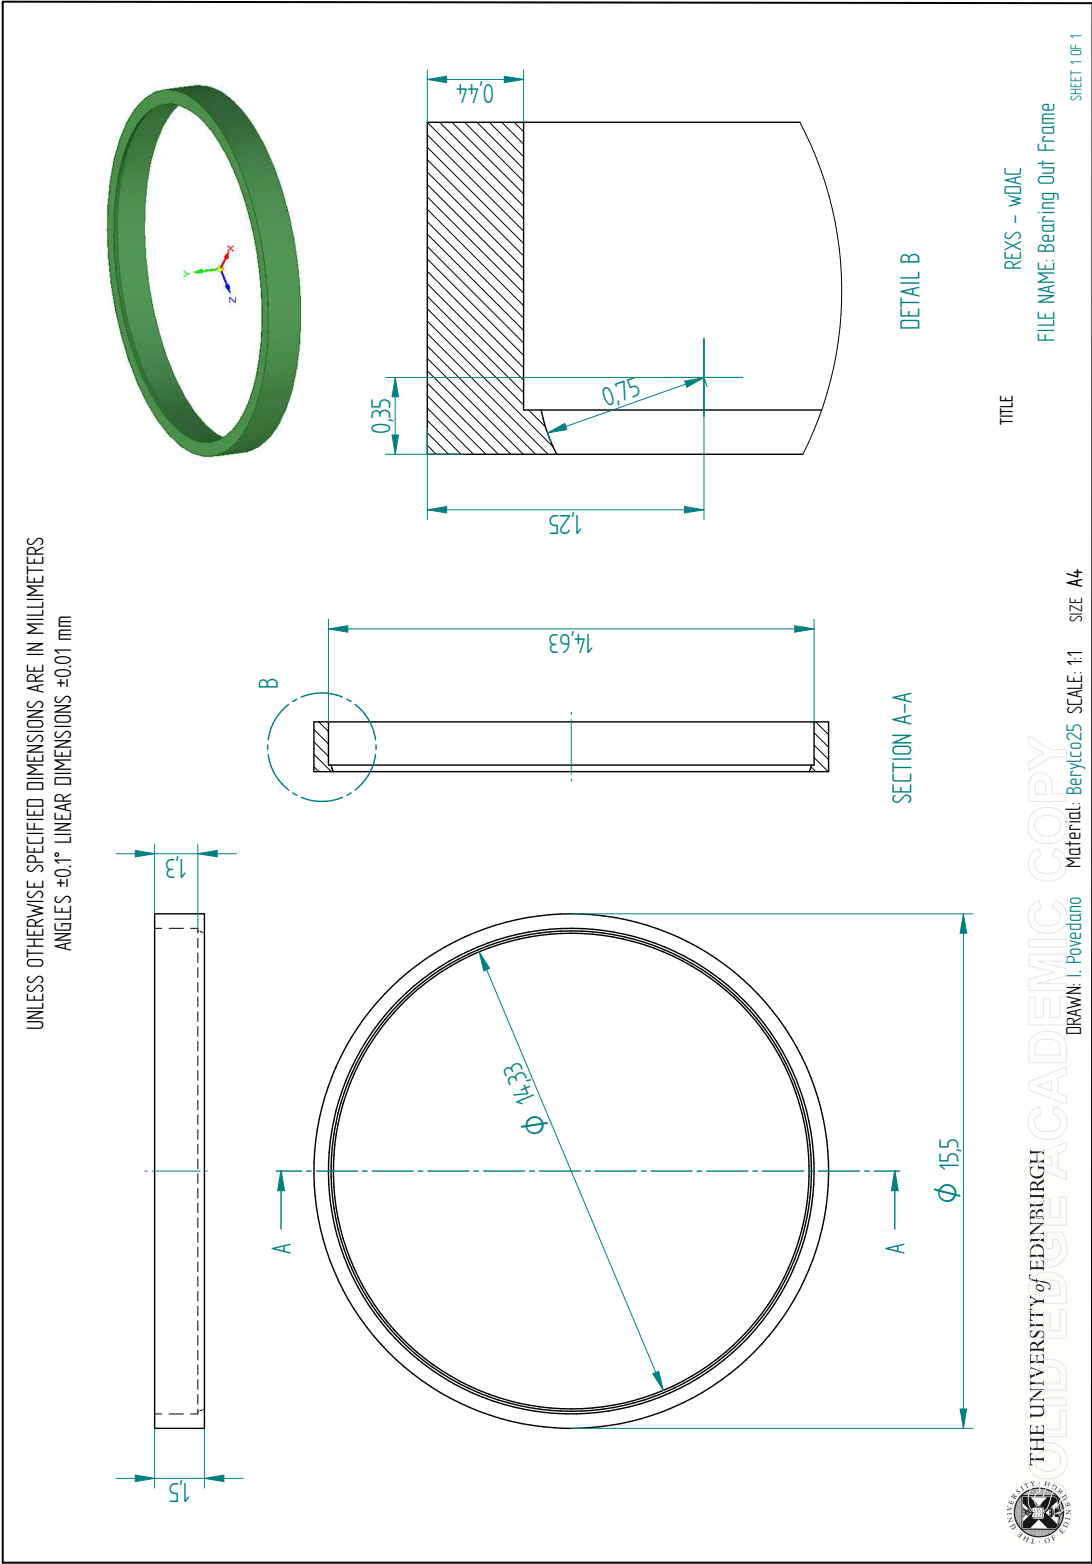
Outer bearing frame. Sheet 1 of 1.
